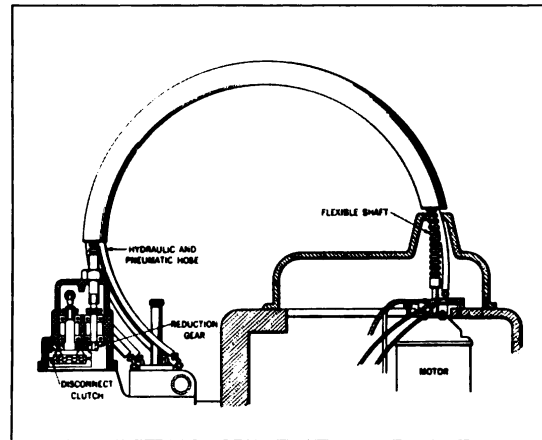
Flexible drive transmission assembly includes drive shaft, pneumatic and hydraulic lines.
